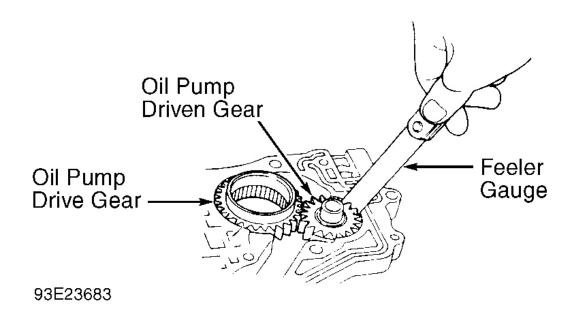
Measuring Oil Pump Clearances Checking Side Clearance Courtesy of AMERICAN HONDA MOTOR CO., INC.
